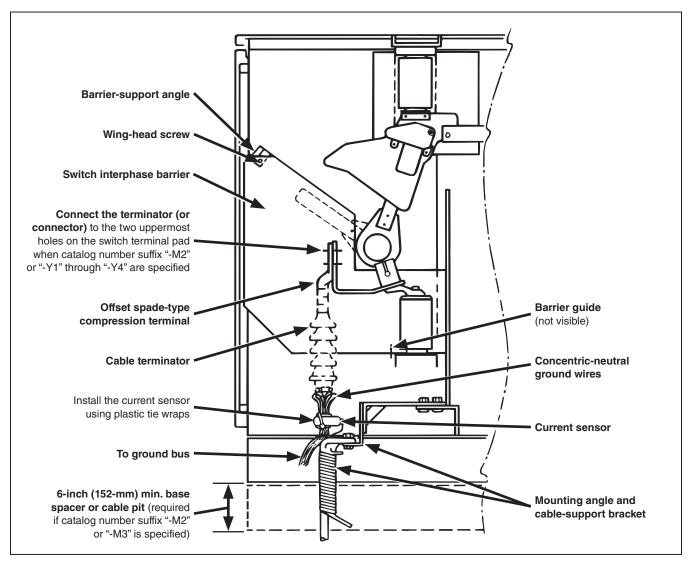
Side view of the switch showing the interphase barrier attachment points, terminal-pad connections, installation of the current sensors (furnished with the optional Overcurrent Lockout feature), and optional cable guides.
